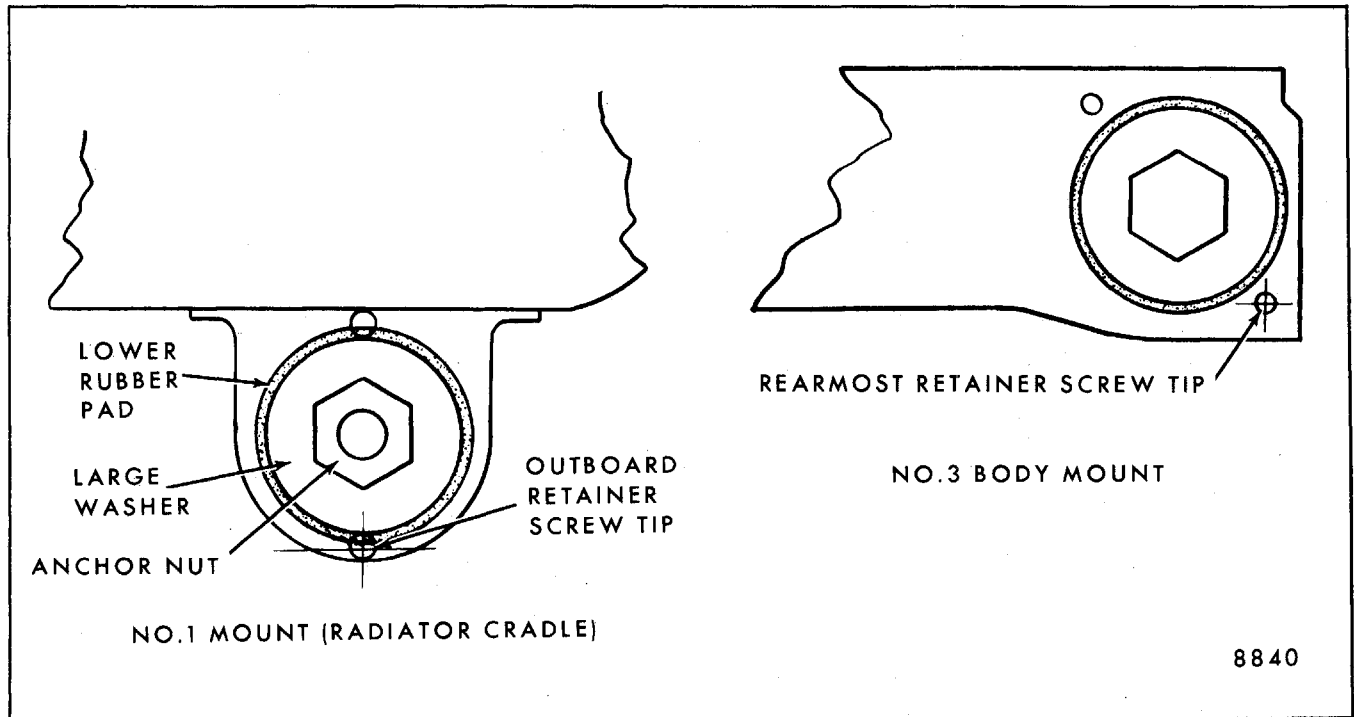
No. 1 Mount (Radiator Cradle) and No. 3 Body Mount - "K" Body
